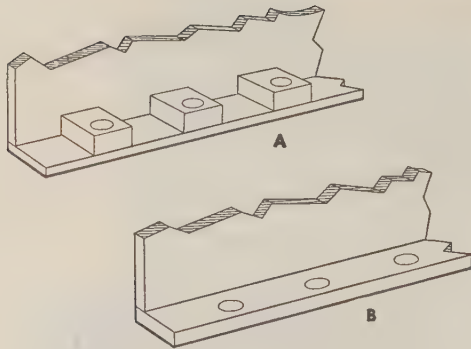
COMPARATIVE TREATMENTS OF BOLTING FLANGES IN A WELDED PART
